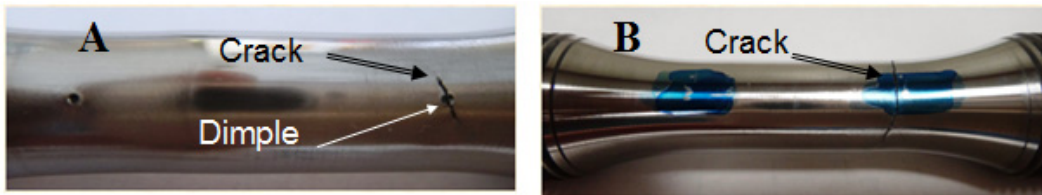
Photos of premature failure caused by (A) dimple and (B) knife-edge
